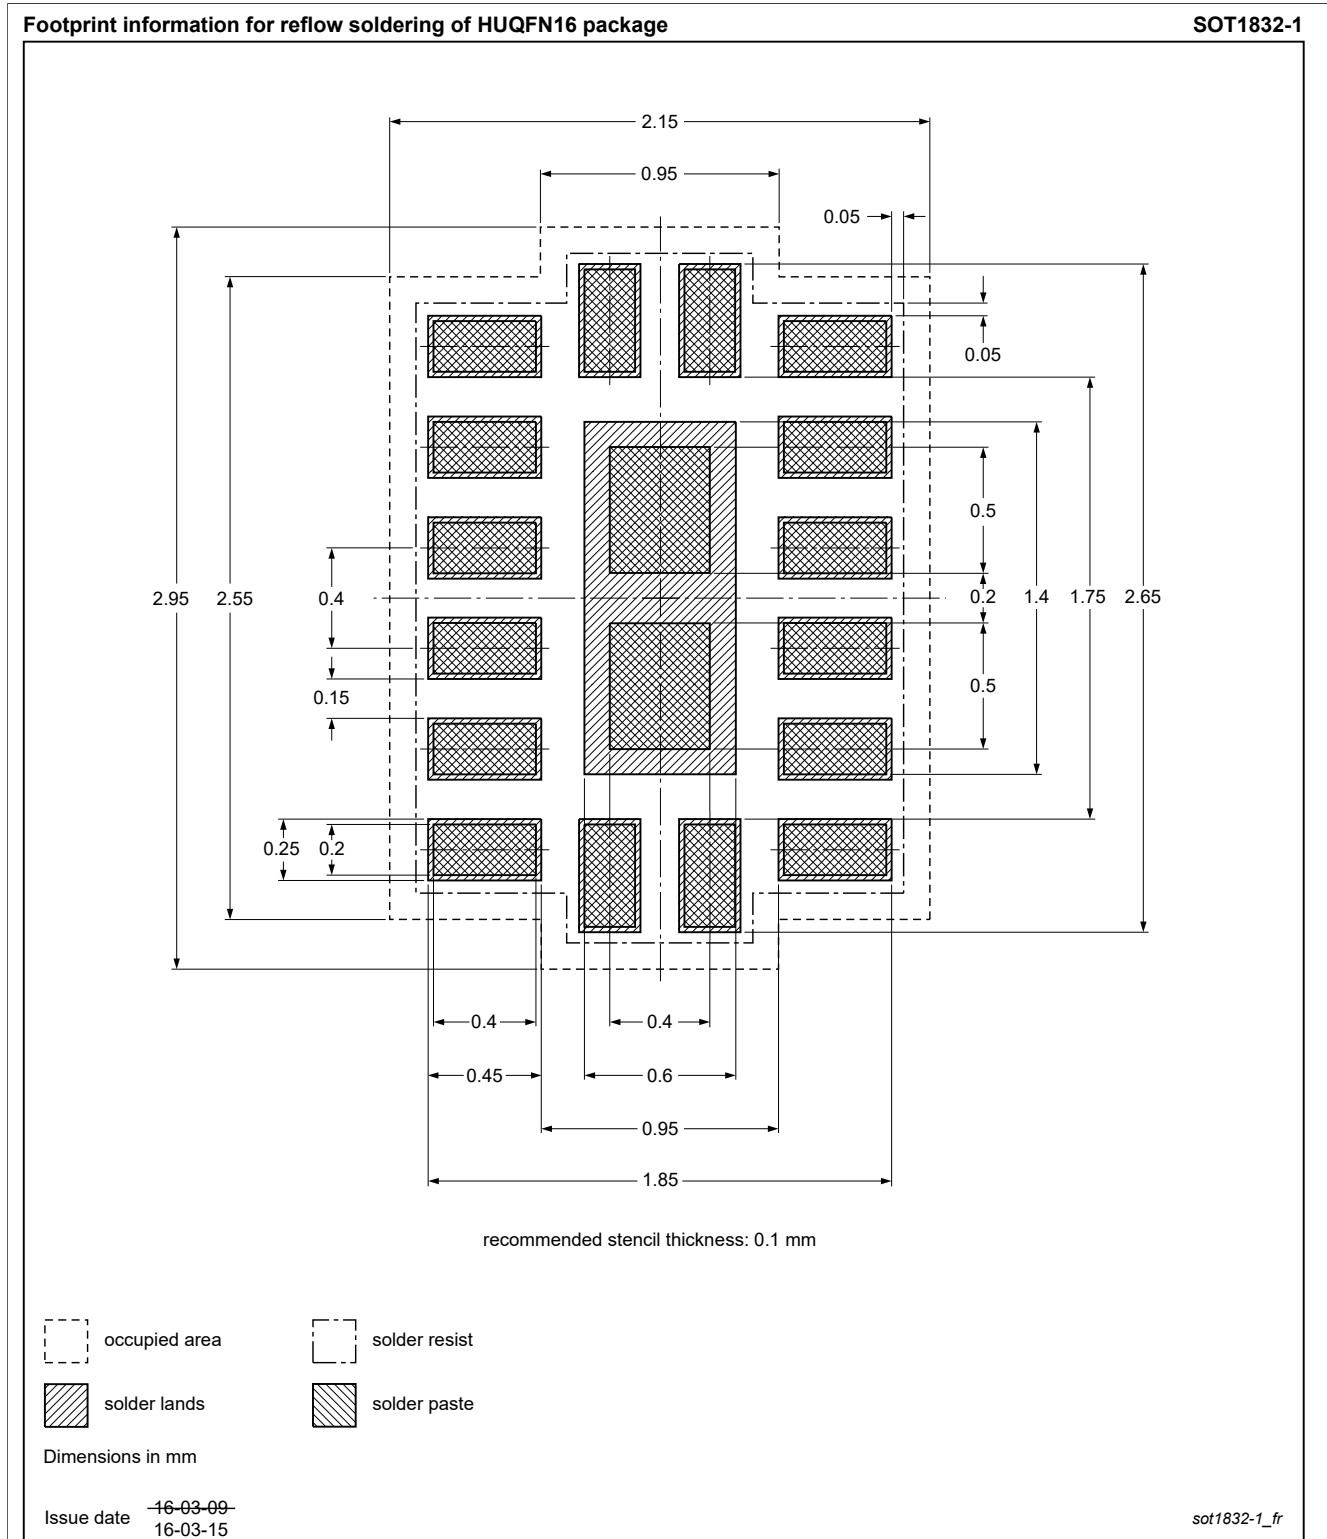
PCB footprint for SOT1832-1 (HUQFN16); reflow soldering
